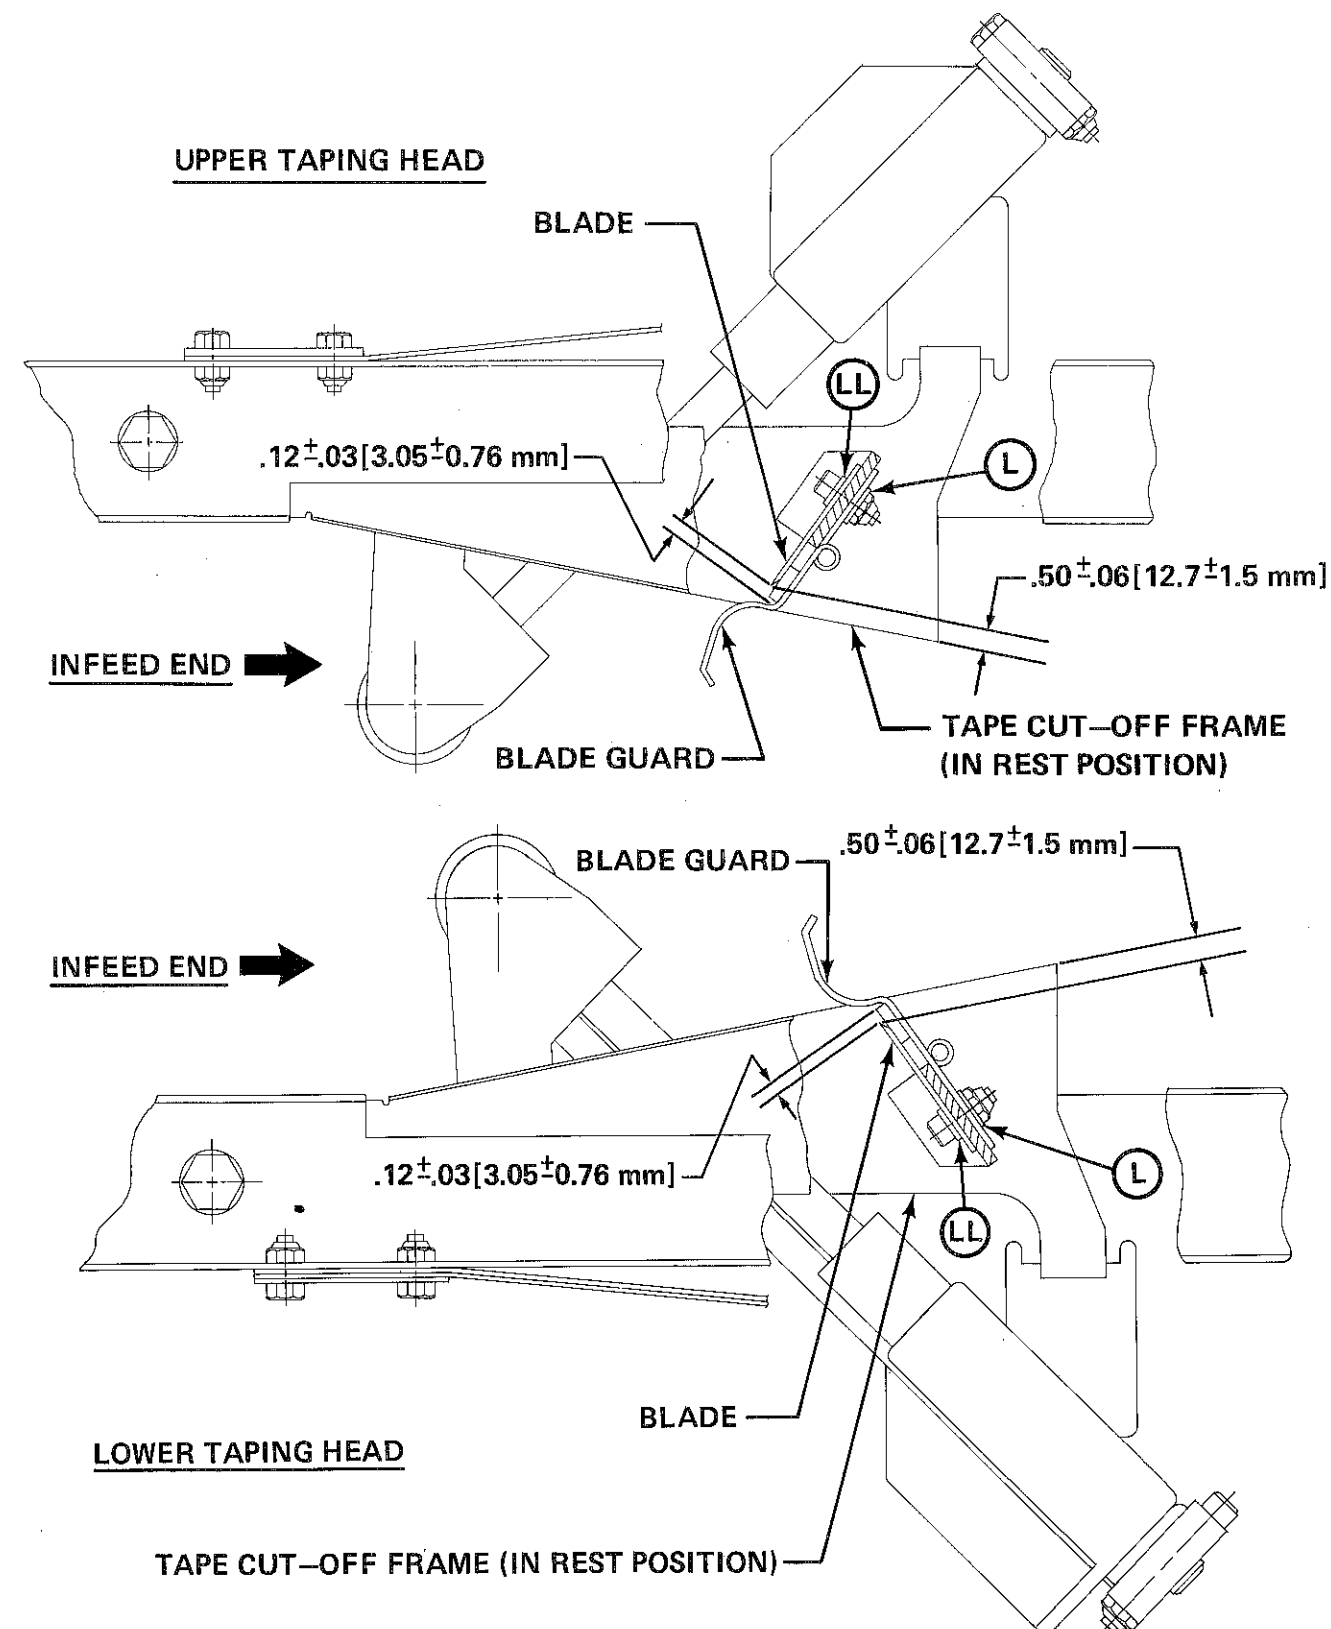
UPPER AND LOWER CUT-OFF ADJUSTMENT - RIGHT SIDE VIEW
